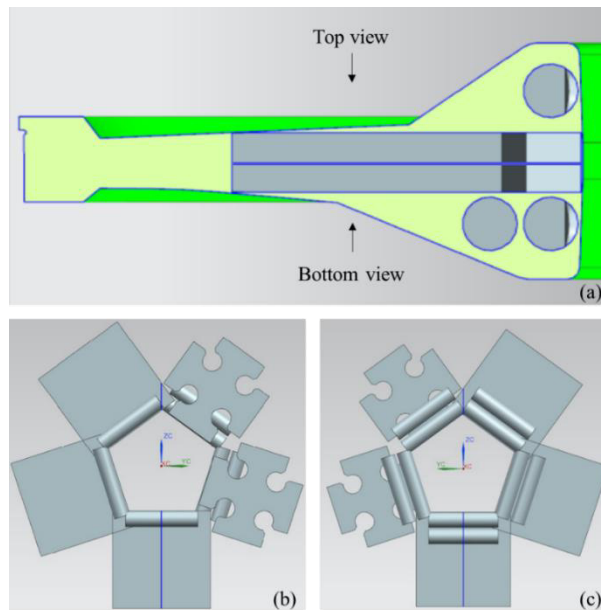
Specimen extraction plan [4.1]: (a) Specimen extraction location on the turbine disk, biaxial specimen (two specimens per group) from diaphragm, uniaxial specimen (three specimens per group) from bore; (b) Top view; (c) Bottom view.
